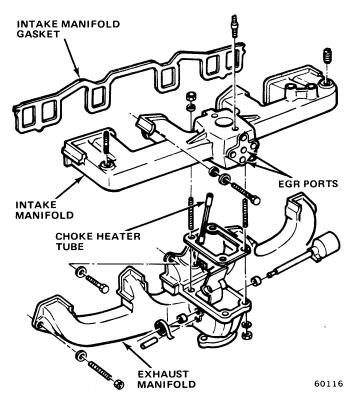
A-12 Intake and Exhaust Manifold Assembly
